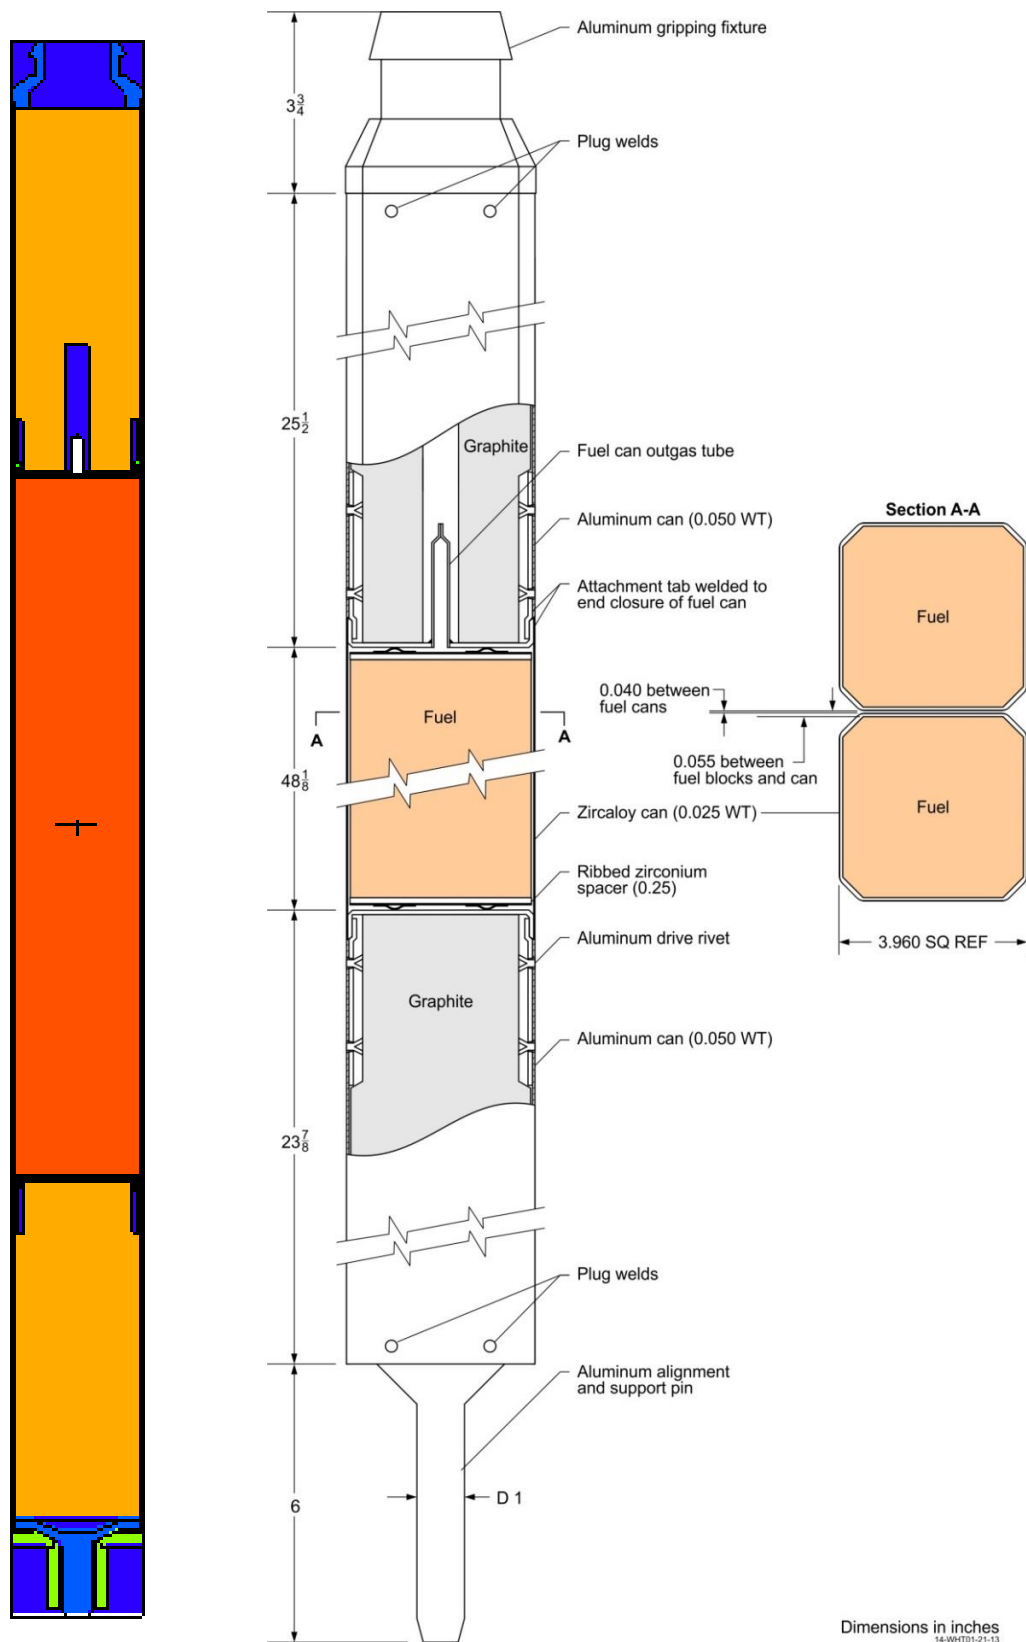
Standard Fuel Assembly: Model (left) and Drawing (Right).
